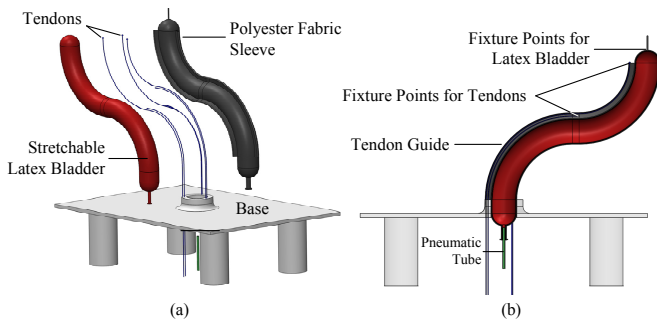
CAD drawing of the structure for the novel soft manipulator: (a) Exploded view and (b) Assembled view.
